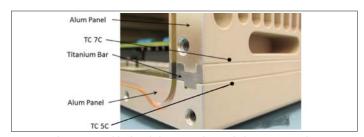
Chassis assembly detail showing Ti bar and aluminum panels.
